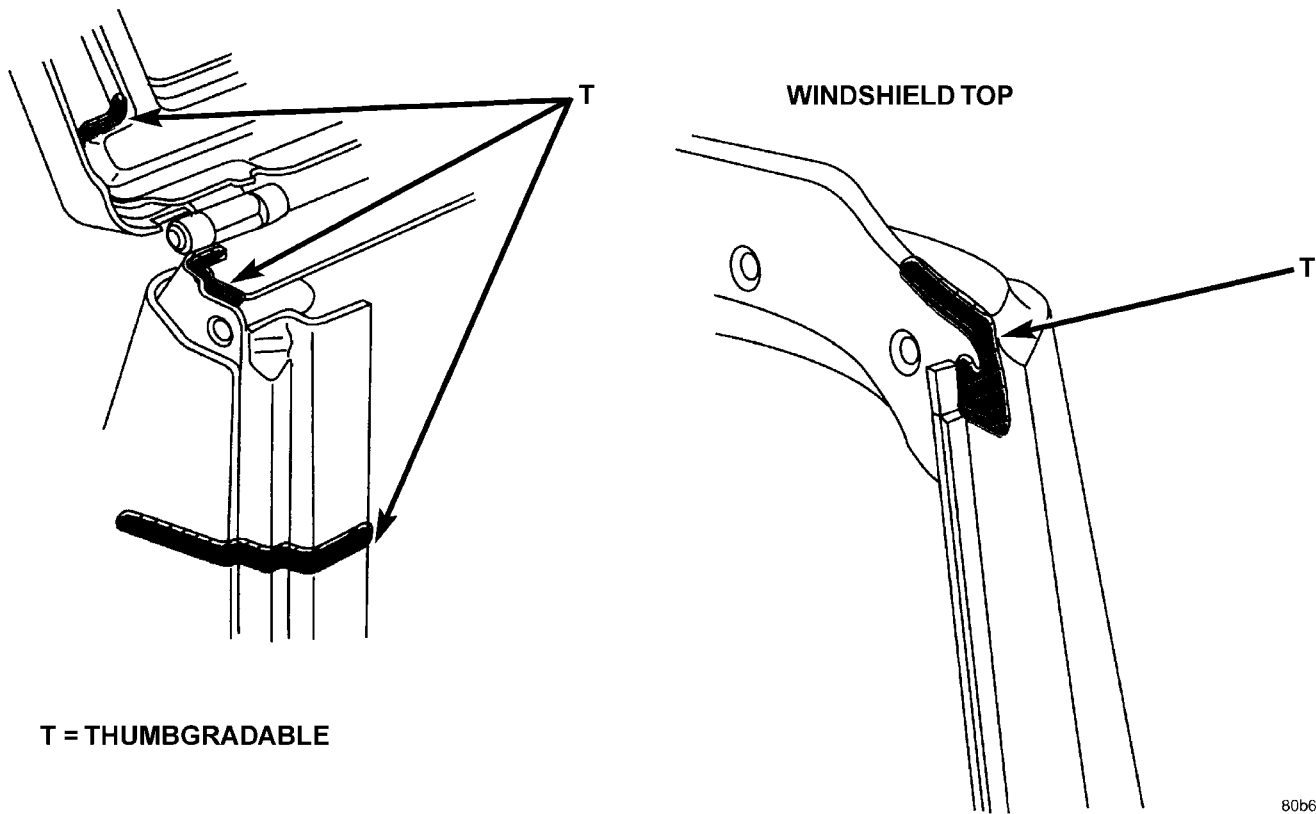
COWL AND WINDSHIELD OUTER PANEL
